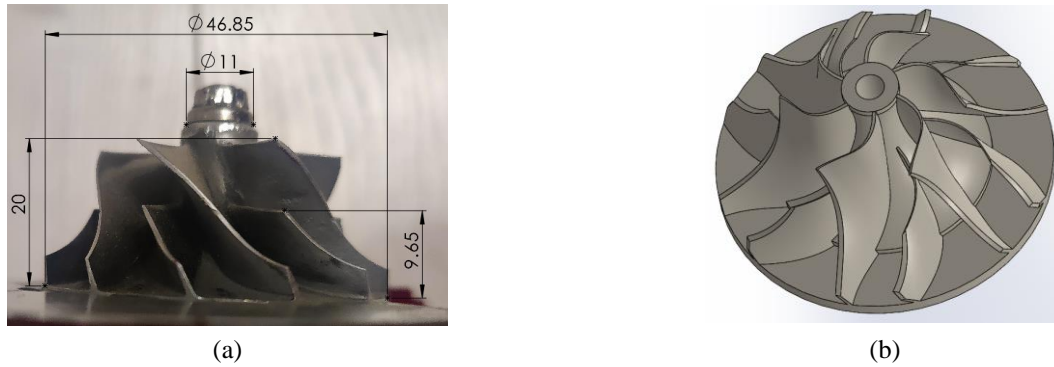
Pump impeller: (a) view of the actual object with main dimensions marked, (b) CAD model
